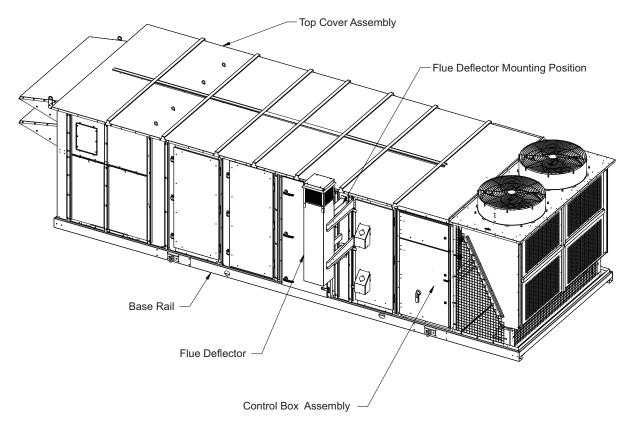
Flue Discharge Deflector Mounting Position (High Heat)
